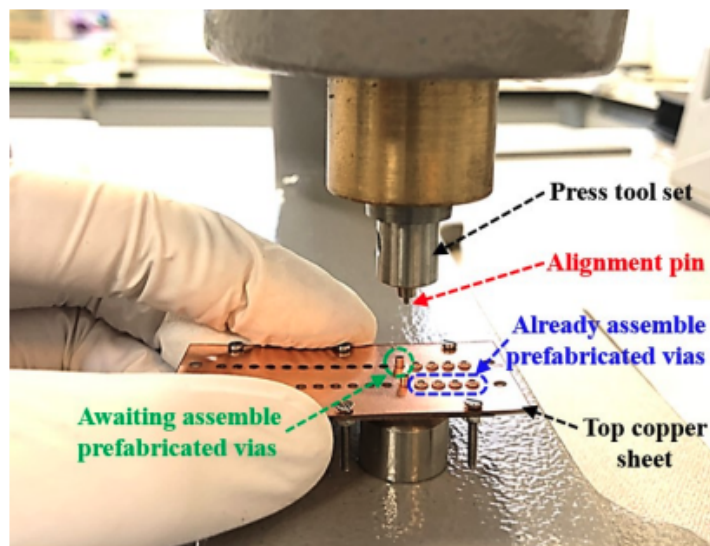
Assembly process of the proposed HSIW, by using the Mechanical Through Hole Plating method
